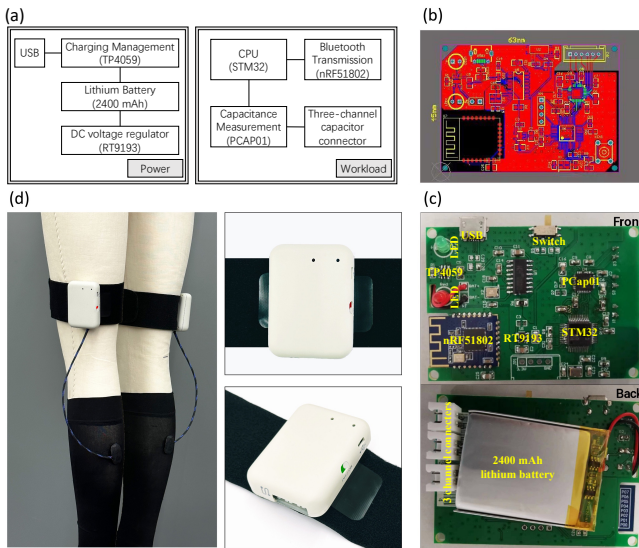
Illustrations of the edge control unit design. (a) Schematic diagram of the edge control unit design. (b) PCB layout diagram. (c) Circuit assembly prototypes. (d) Housing design and connected edge control unit prototypes.
